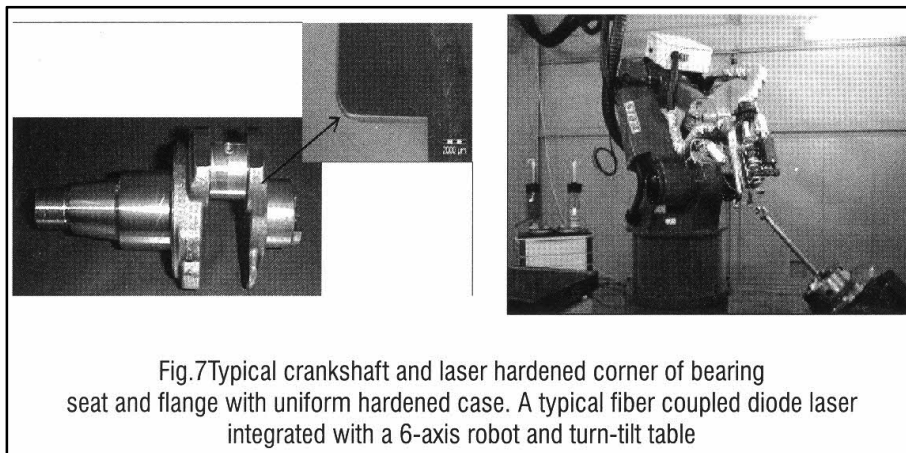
Typical crankshaft and laser hardened corner of bearing seat and flange with uniform hardened case. A typical fiber coupled diode laser integrated with a 6-axis robot and turn-tilt table
